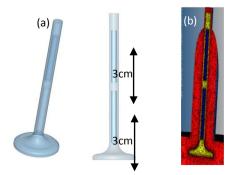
(a) ProE design views; (b) Meshing of through stem two collinear holes valve
